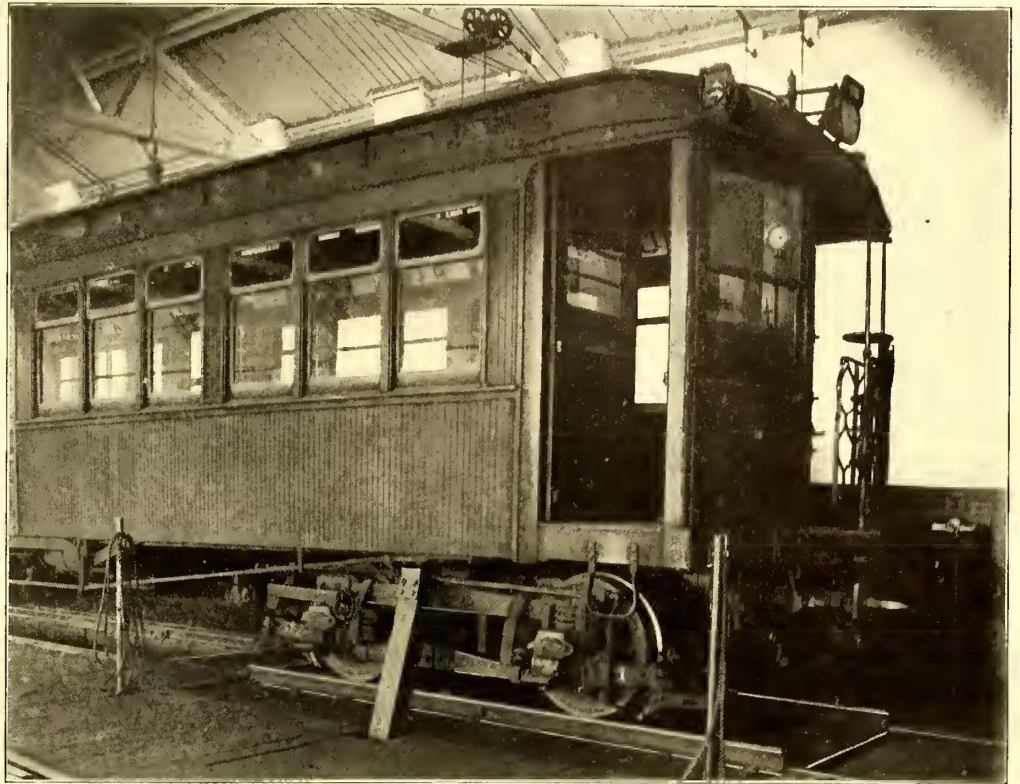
CAR, WITH TRUCK ON ELEVATOR, FIRST OPERATION, ELEVATOR RAISED SLIGHTLY TO INSERT BRACES FOR HOLDING BODY
